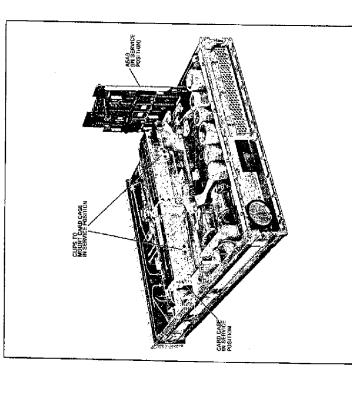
A5 Card Cage and Processor Board in Service Position
